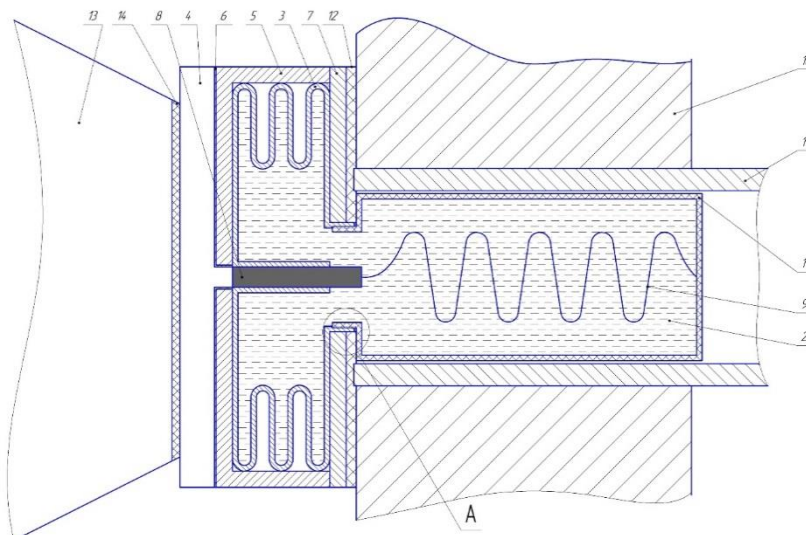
The proposed device for pulse press-fitting pipes into a tube board of a shell-and-tube heat exchanger: 1 – body, 2 – pressure transmitter, 3 – shank-bellows, 4 – electrode, 5 – cup, 6 – insulator, 7 – support flange, 8 – current conductor, 9 – exploding conductor, 10 – tube sheet, 11 – heat-exchange tube, 12 – sealer, 13 – anvil, 14 – insulator.
